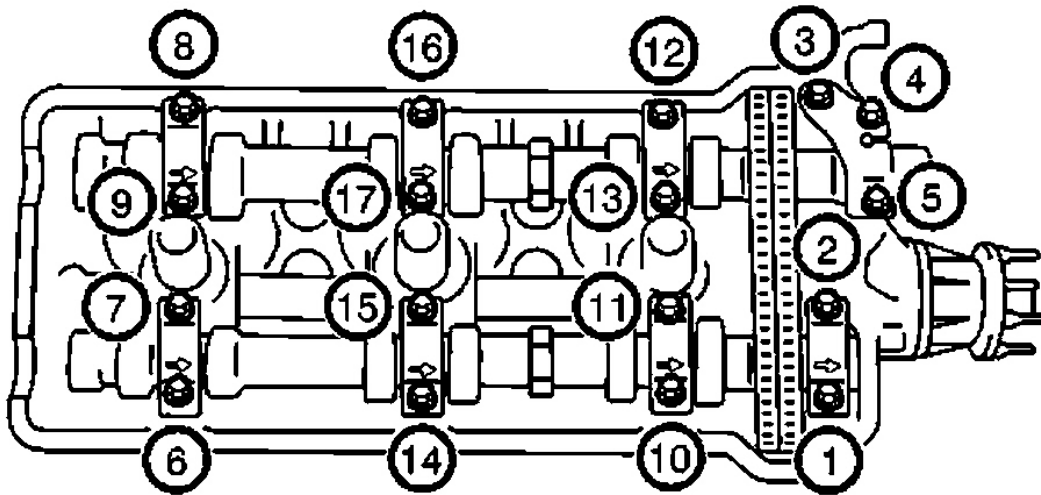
Left Camshafts Bearing Cap Bolt Removal Sequence
